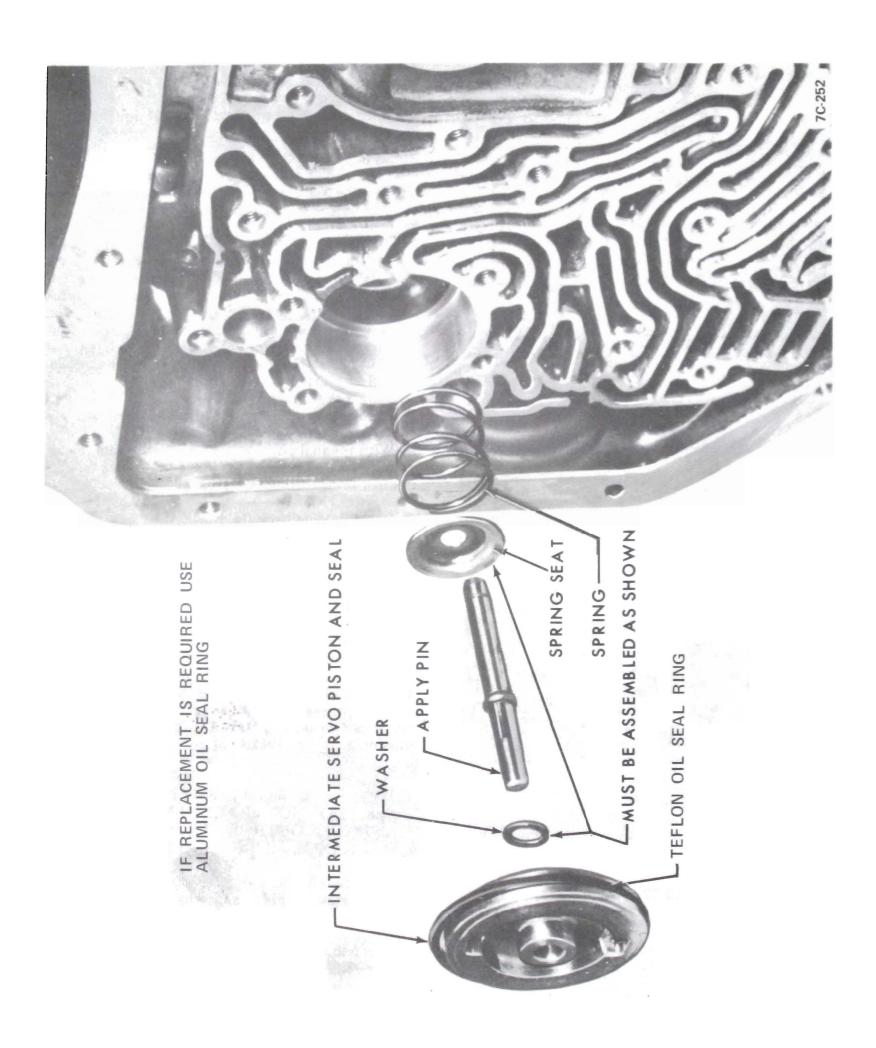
C-288 Intermediate Servo Assembly - Exploded View
